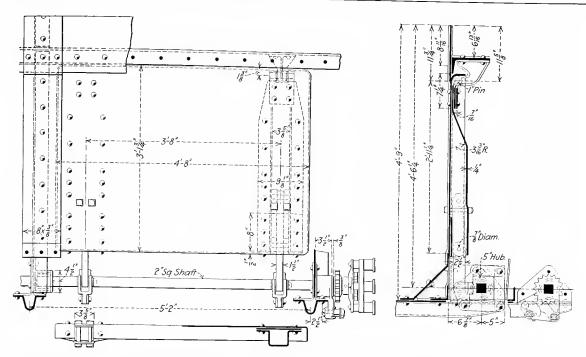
Door Operating Apparatus for Side Dump Gondola Car. Enterprise Railway Equipment Company.
